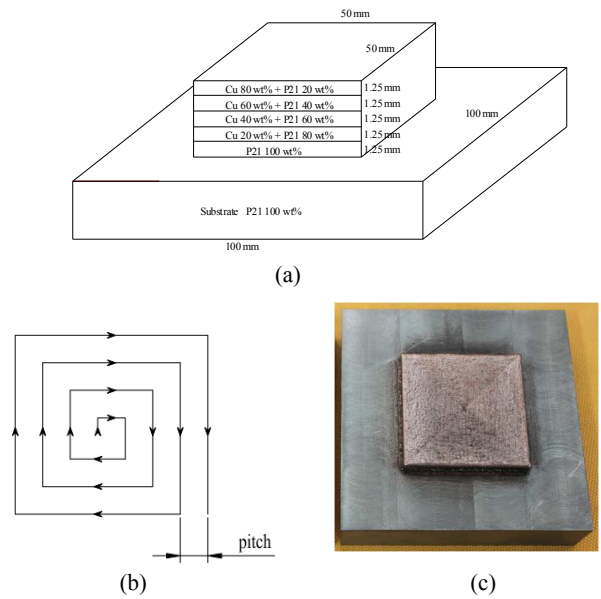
Fabrication of a P21-Cu FGM part by DMT : (a) detailed dimensions of the specimen , (b) laser path on a layer, (c) fabricated FGM part
